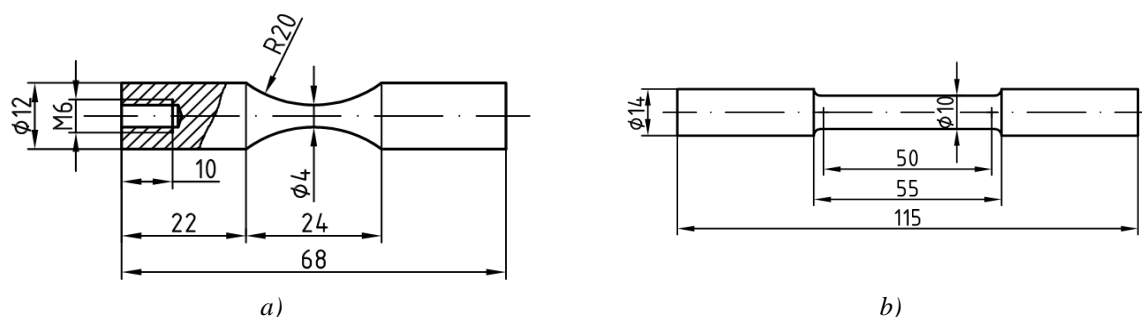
Geometry of specimens used for fatigue (a) and tensile (b) tests.
